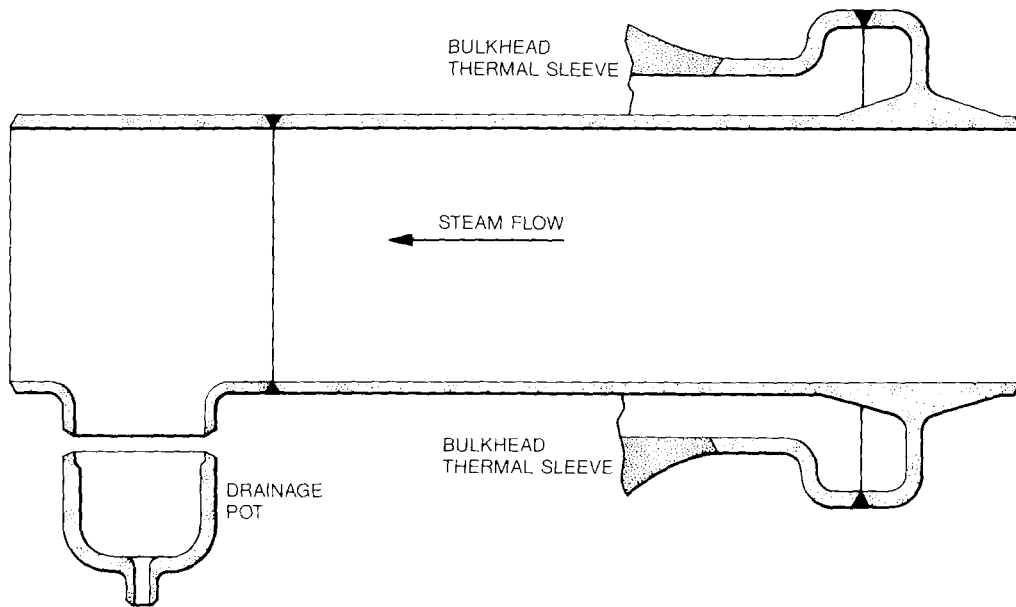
IMPROVED DESIGN SEALING RING WITH ACCESSIBLE WELDS, IMPROVED FLEXIBILITY UNDER LOAD AND AN INTEGRAL DRAINAGE ARRANGEMENT
